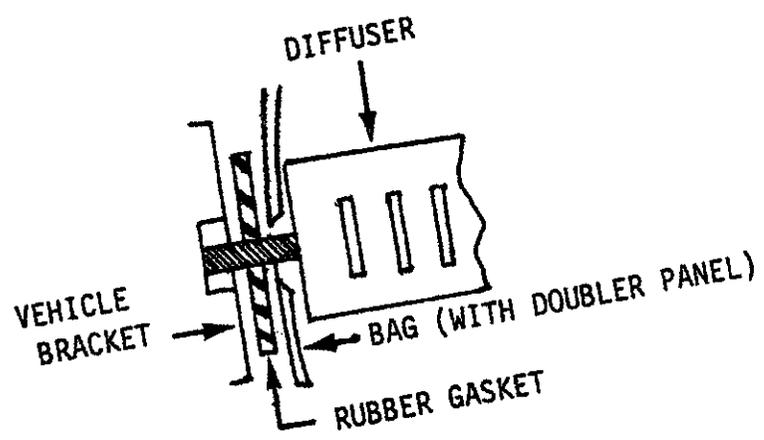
AIRBAG CLAMPING CONFIGURATION
